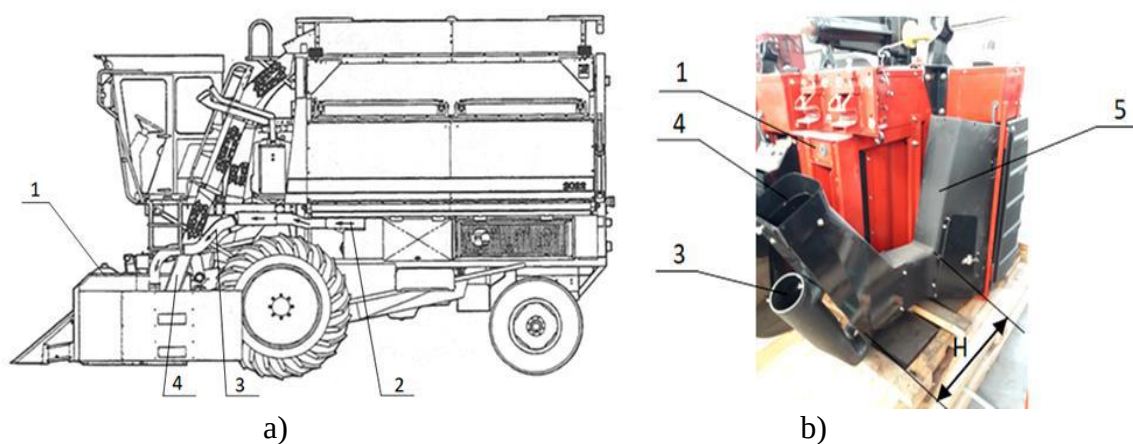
Horizontal spindle Cotton Machine: a–Case-2022 air transport system, b – JX– 220 receiving camera of machine
